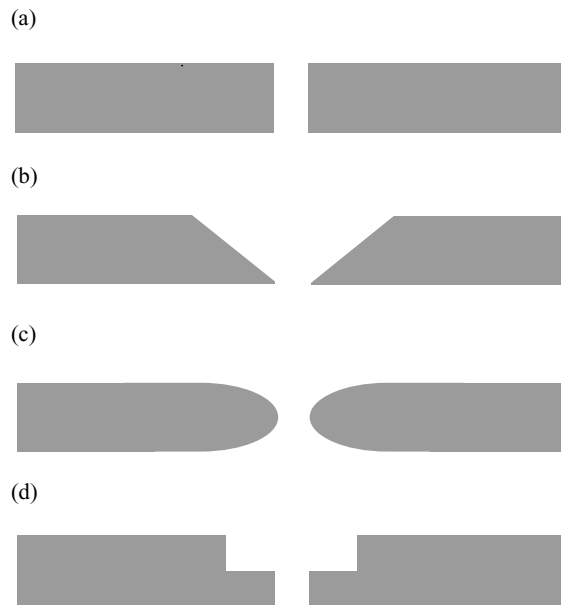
Repair joint surface designs: (A) butt joint, (B) bevel joint, (C) rounded joint, and (D) rabbet joint.
